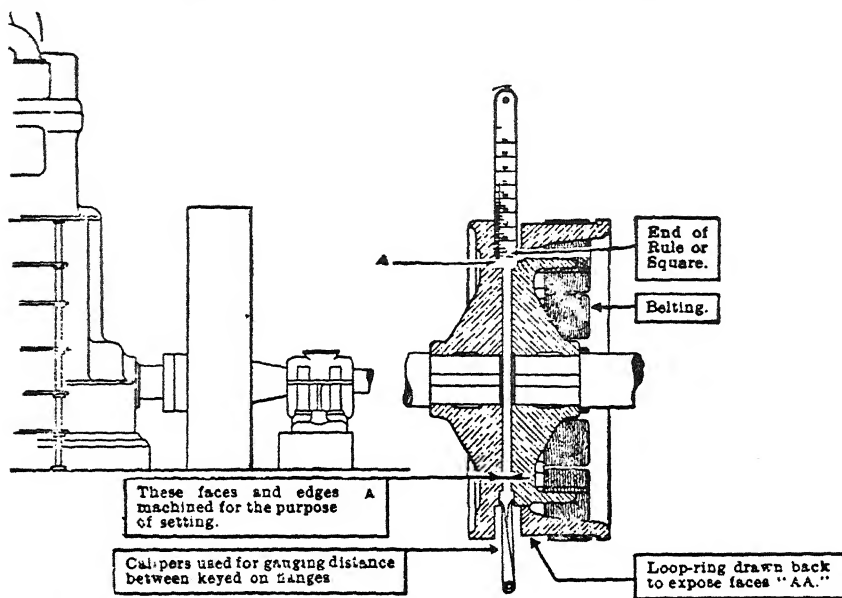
METHOD OF LINING UP FLEXIBLE COUPLING (*Ruston & Hornsby, Ltd.*)
